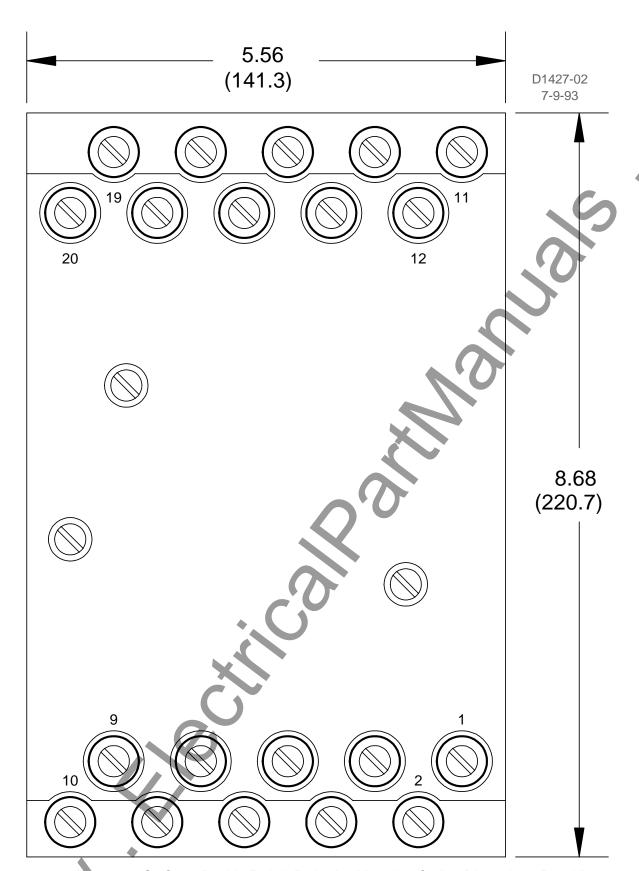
S1 Case, Double-Ended, Projection Mounting, Outline Dimensions, Rear View
